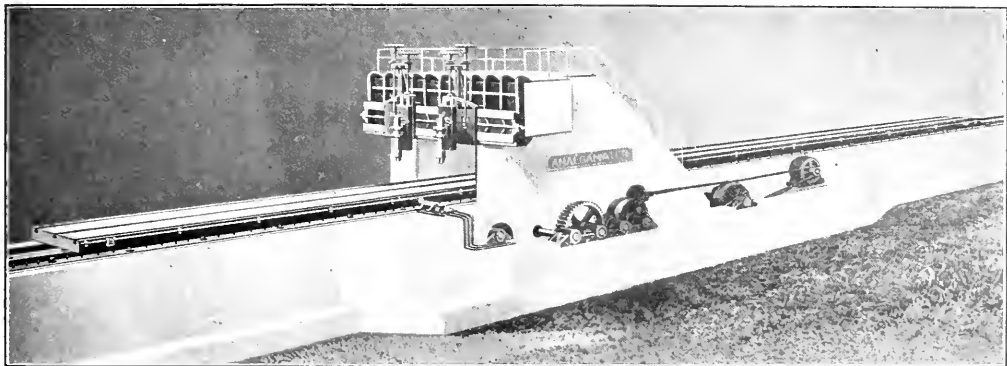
REINFORCED-CONCRETE PLANING MACHINE WITH 80-FT. BED FOR WORK ON GUN-BORING MACHINES
